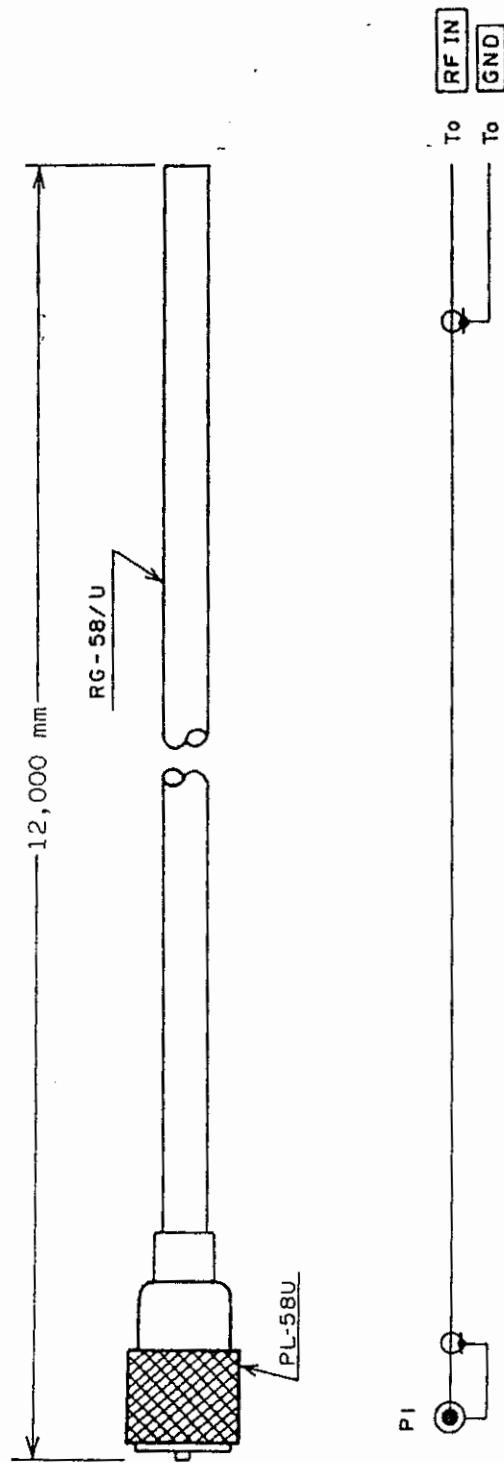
RF Cable (CFQ-2859-012) Assembly Drawing
